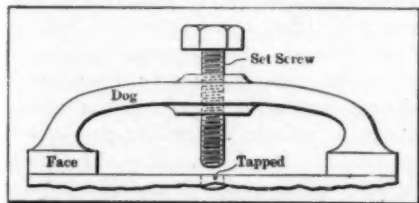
Type of dog often used in motor construction to hold manifolds in place
